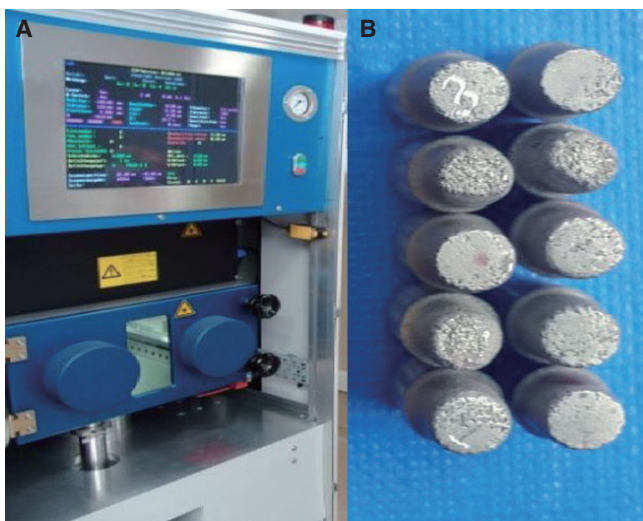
(A) The device for laser sintered copings and (B) The obtained laser sintered Co-Cr copings.
